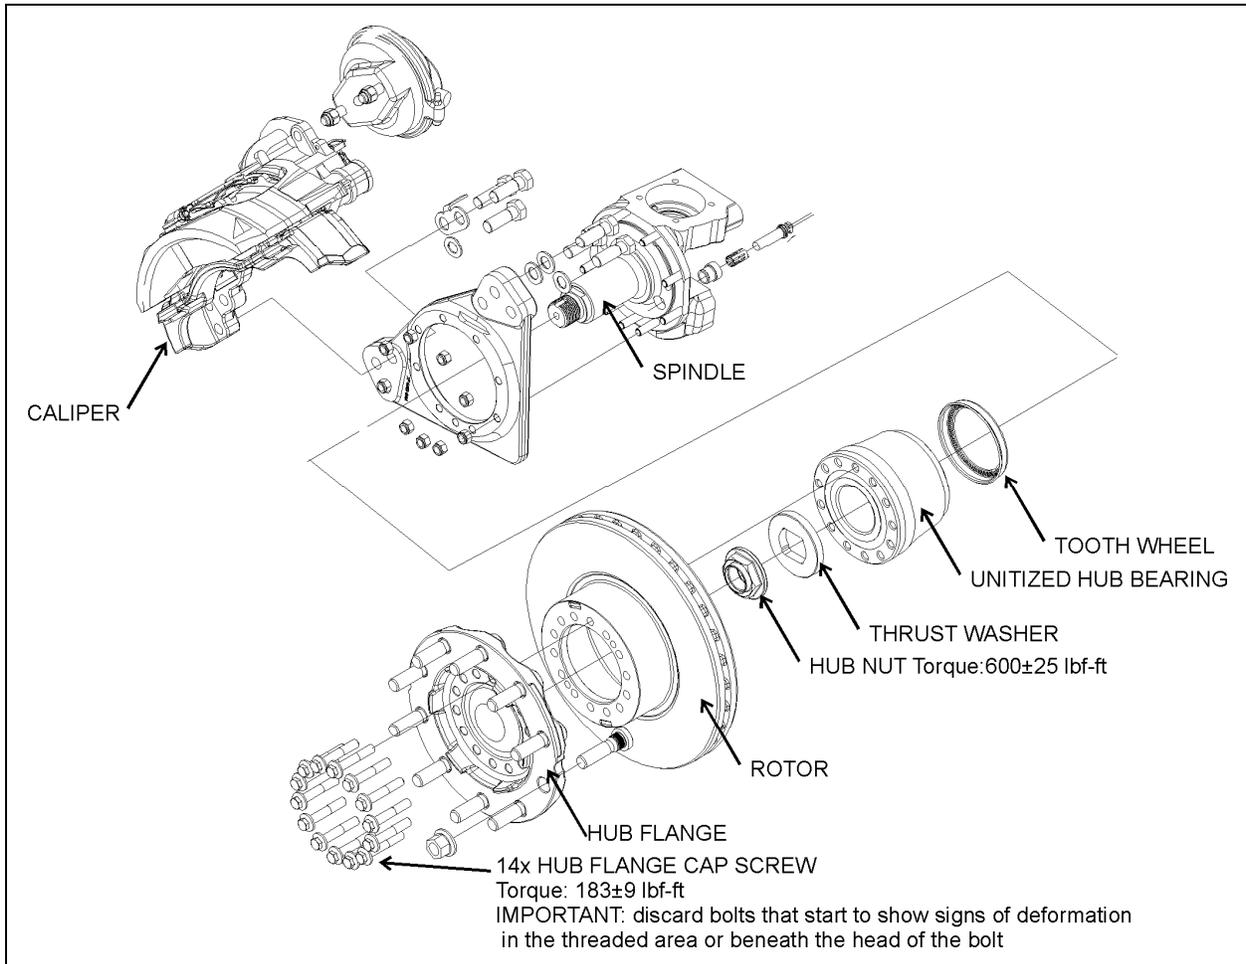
FRONT AXLE HUB AND ROTOR ASSEMBLY
